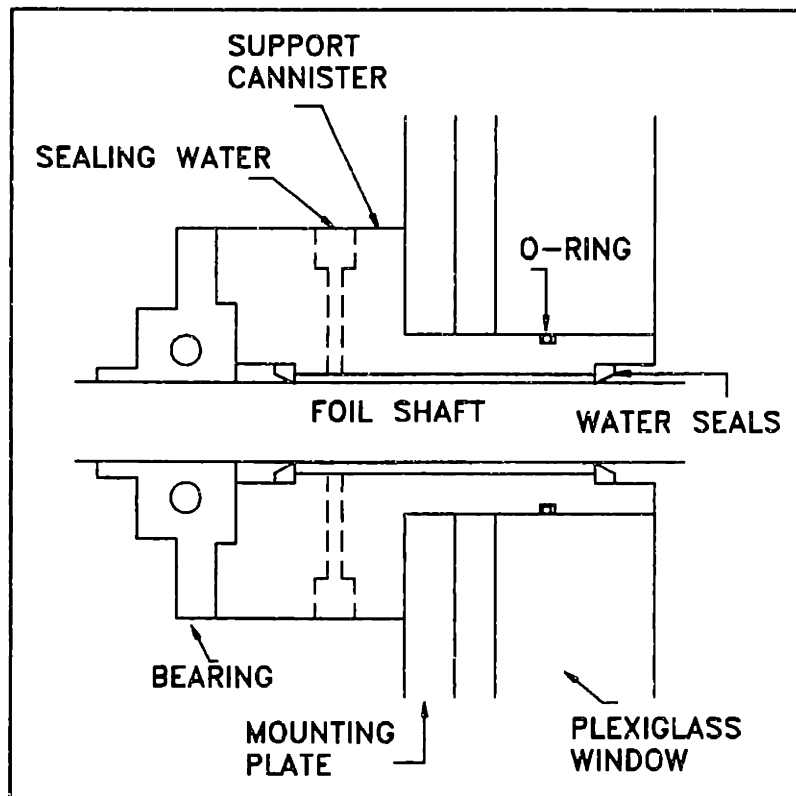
Support Canister and Shaft Sealing Arrangement
